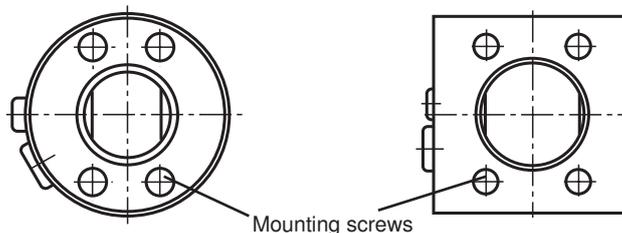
Mounting bores: left-hand side (round) for NG18, 28, 25; right-hand side (rectangular) for NG 71, 100, 140
